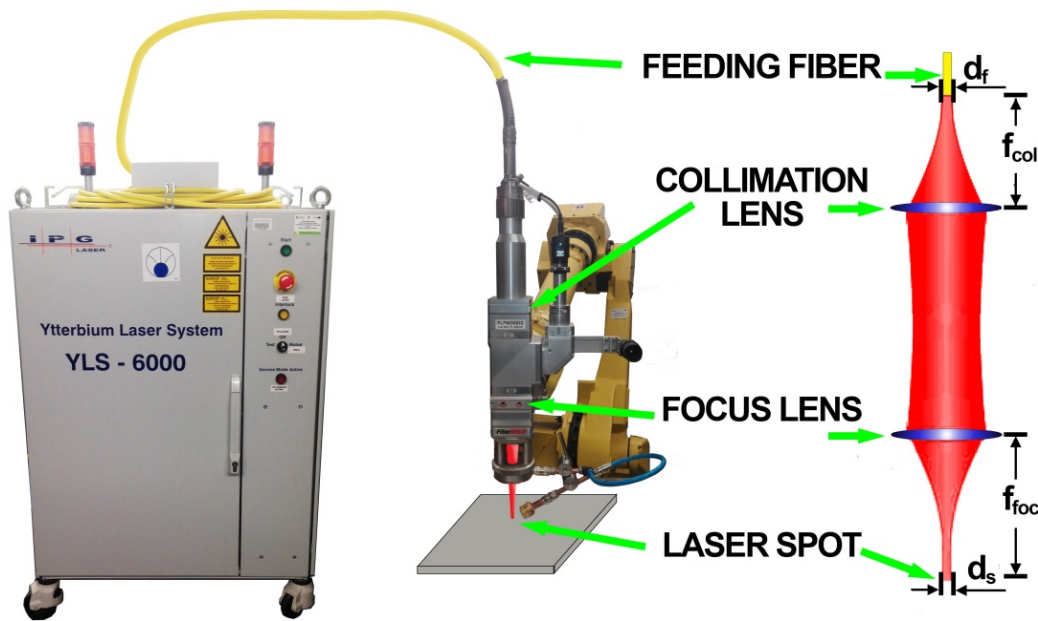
Schematic of the experimental set-up for fiber laser welding
